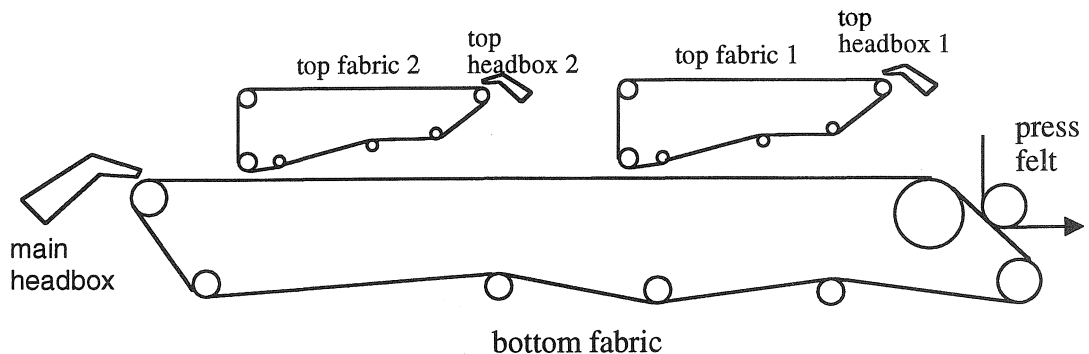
Schematic of a typical multiple forming machine with three forming fabrics.
